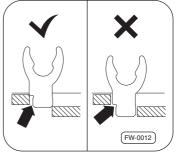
· Wear checks of the fifth wheel lock and wear ring
